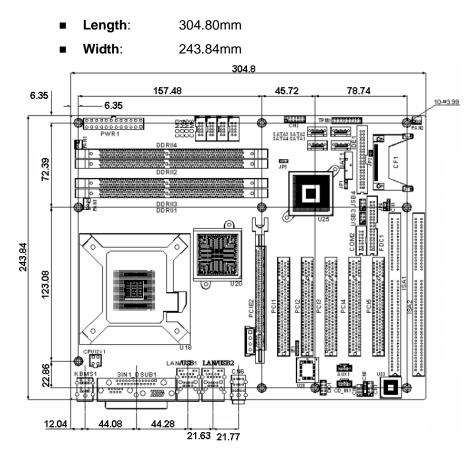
IMBA-9454ISA Dimensions (mm)
